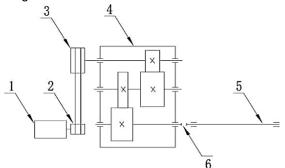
Structural diagram of the machine transmission scheme 1- Motor; 2- Small pulley; 3- Large pulley; 4- Reducer; 5- Stirring spindle; 6- Coupling
